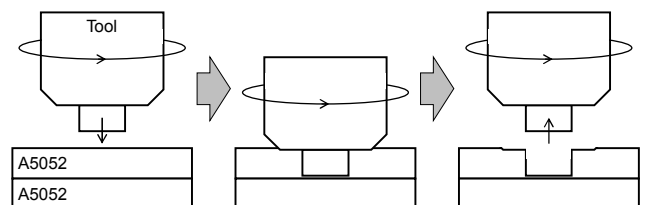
Schematic illustration of friction stir spot welding.
